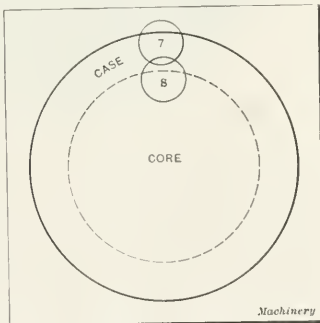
Cross-section of Carburized Piece showing Location of Portions shown in Figs. 7 and 8
